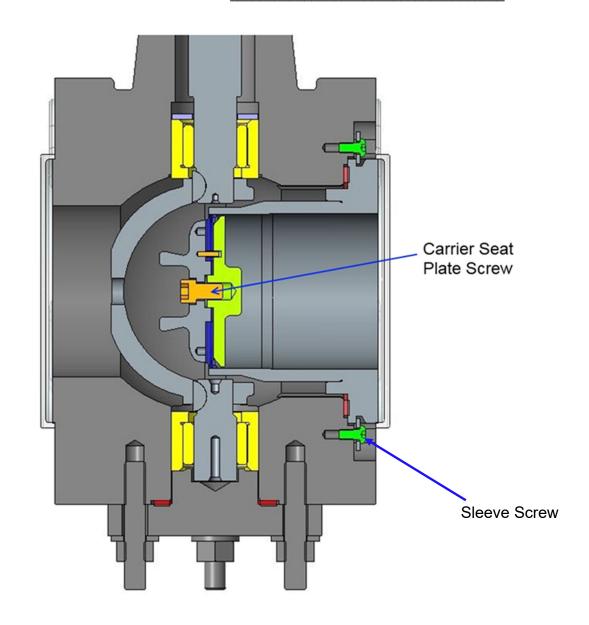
Torque the Carrier Seat Plate Screw and Sleeve Screw
